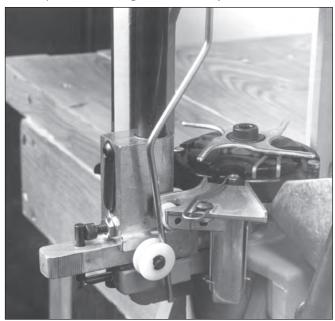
This is the proper alignment of the operating rod and the position of the primer slide fully forward with the primer seating cup in the lowered platform.
